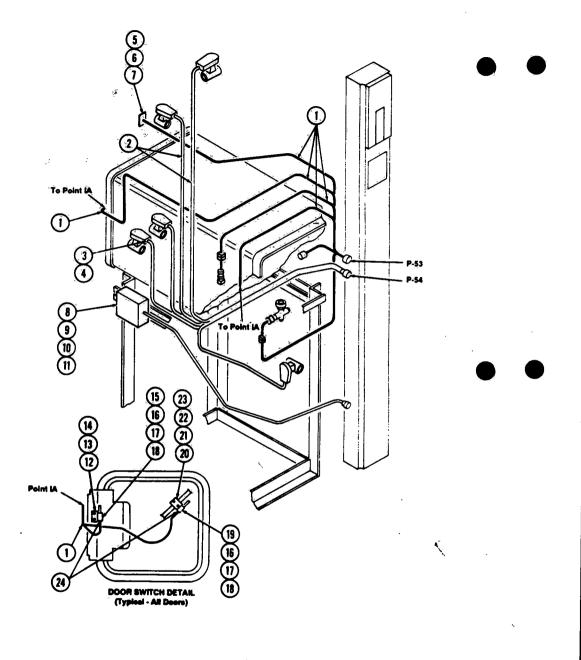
B. WIRING ASSEMBLY - Vacamatic (Units built after 12/89)
